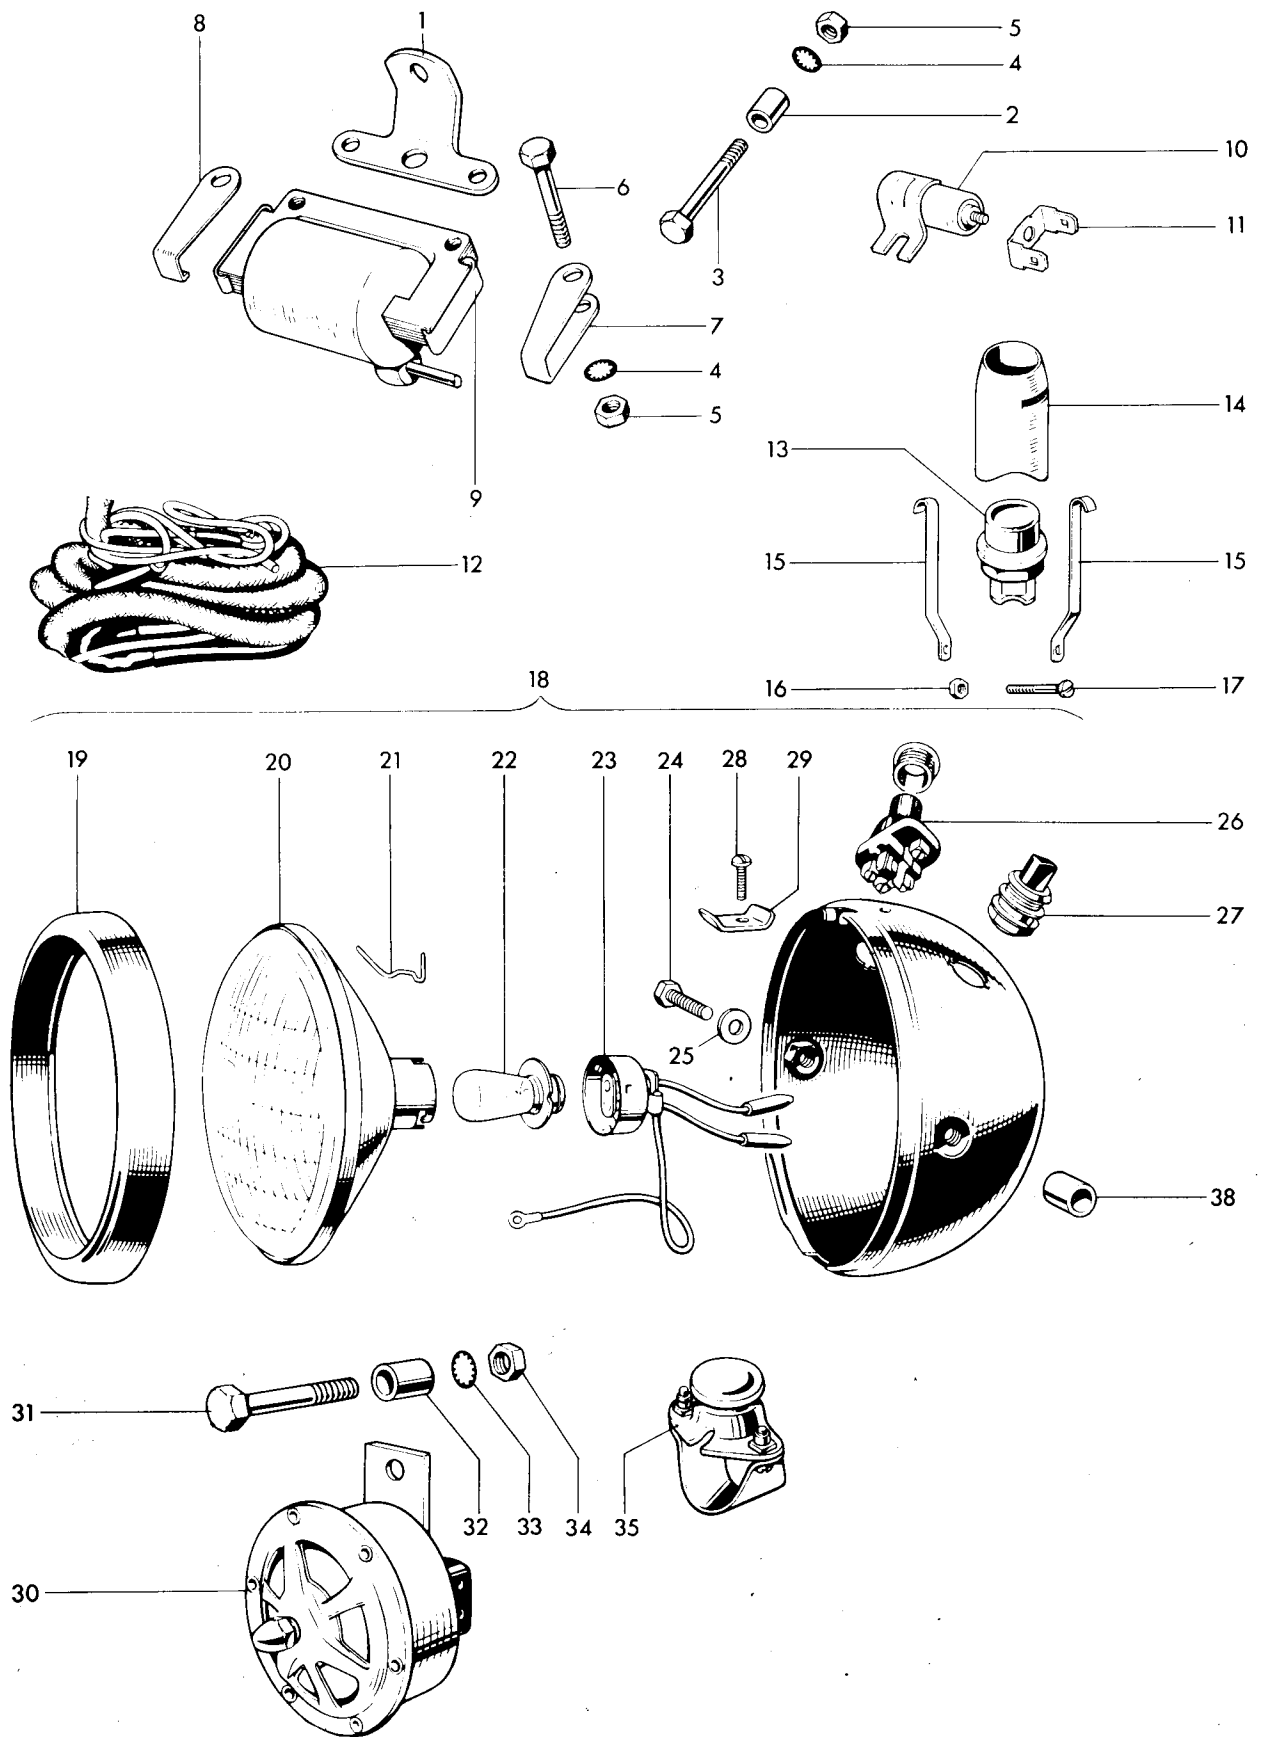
A.C. MAGNETO IGNITION COILS, WIRING HARNESS AND DIRECT LIGHTING
